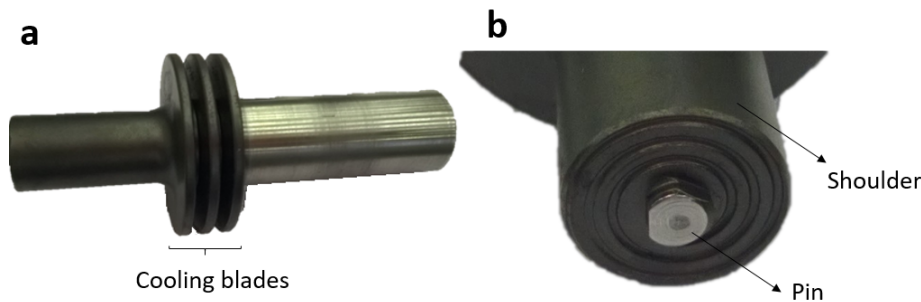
Friction stir processing tool (a) and zoom on the shoulder (20 mm-diameter) and pin (6 mm-diameter) of the tool (b).
